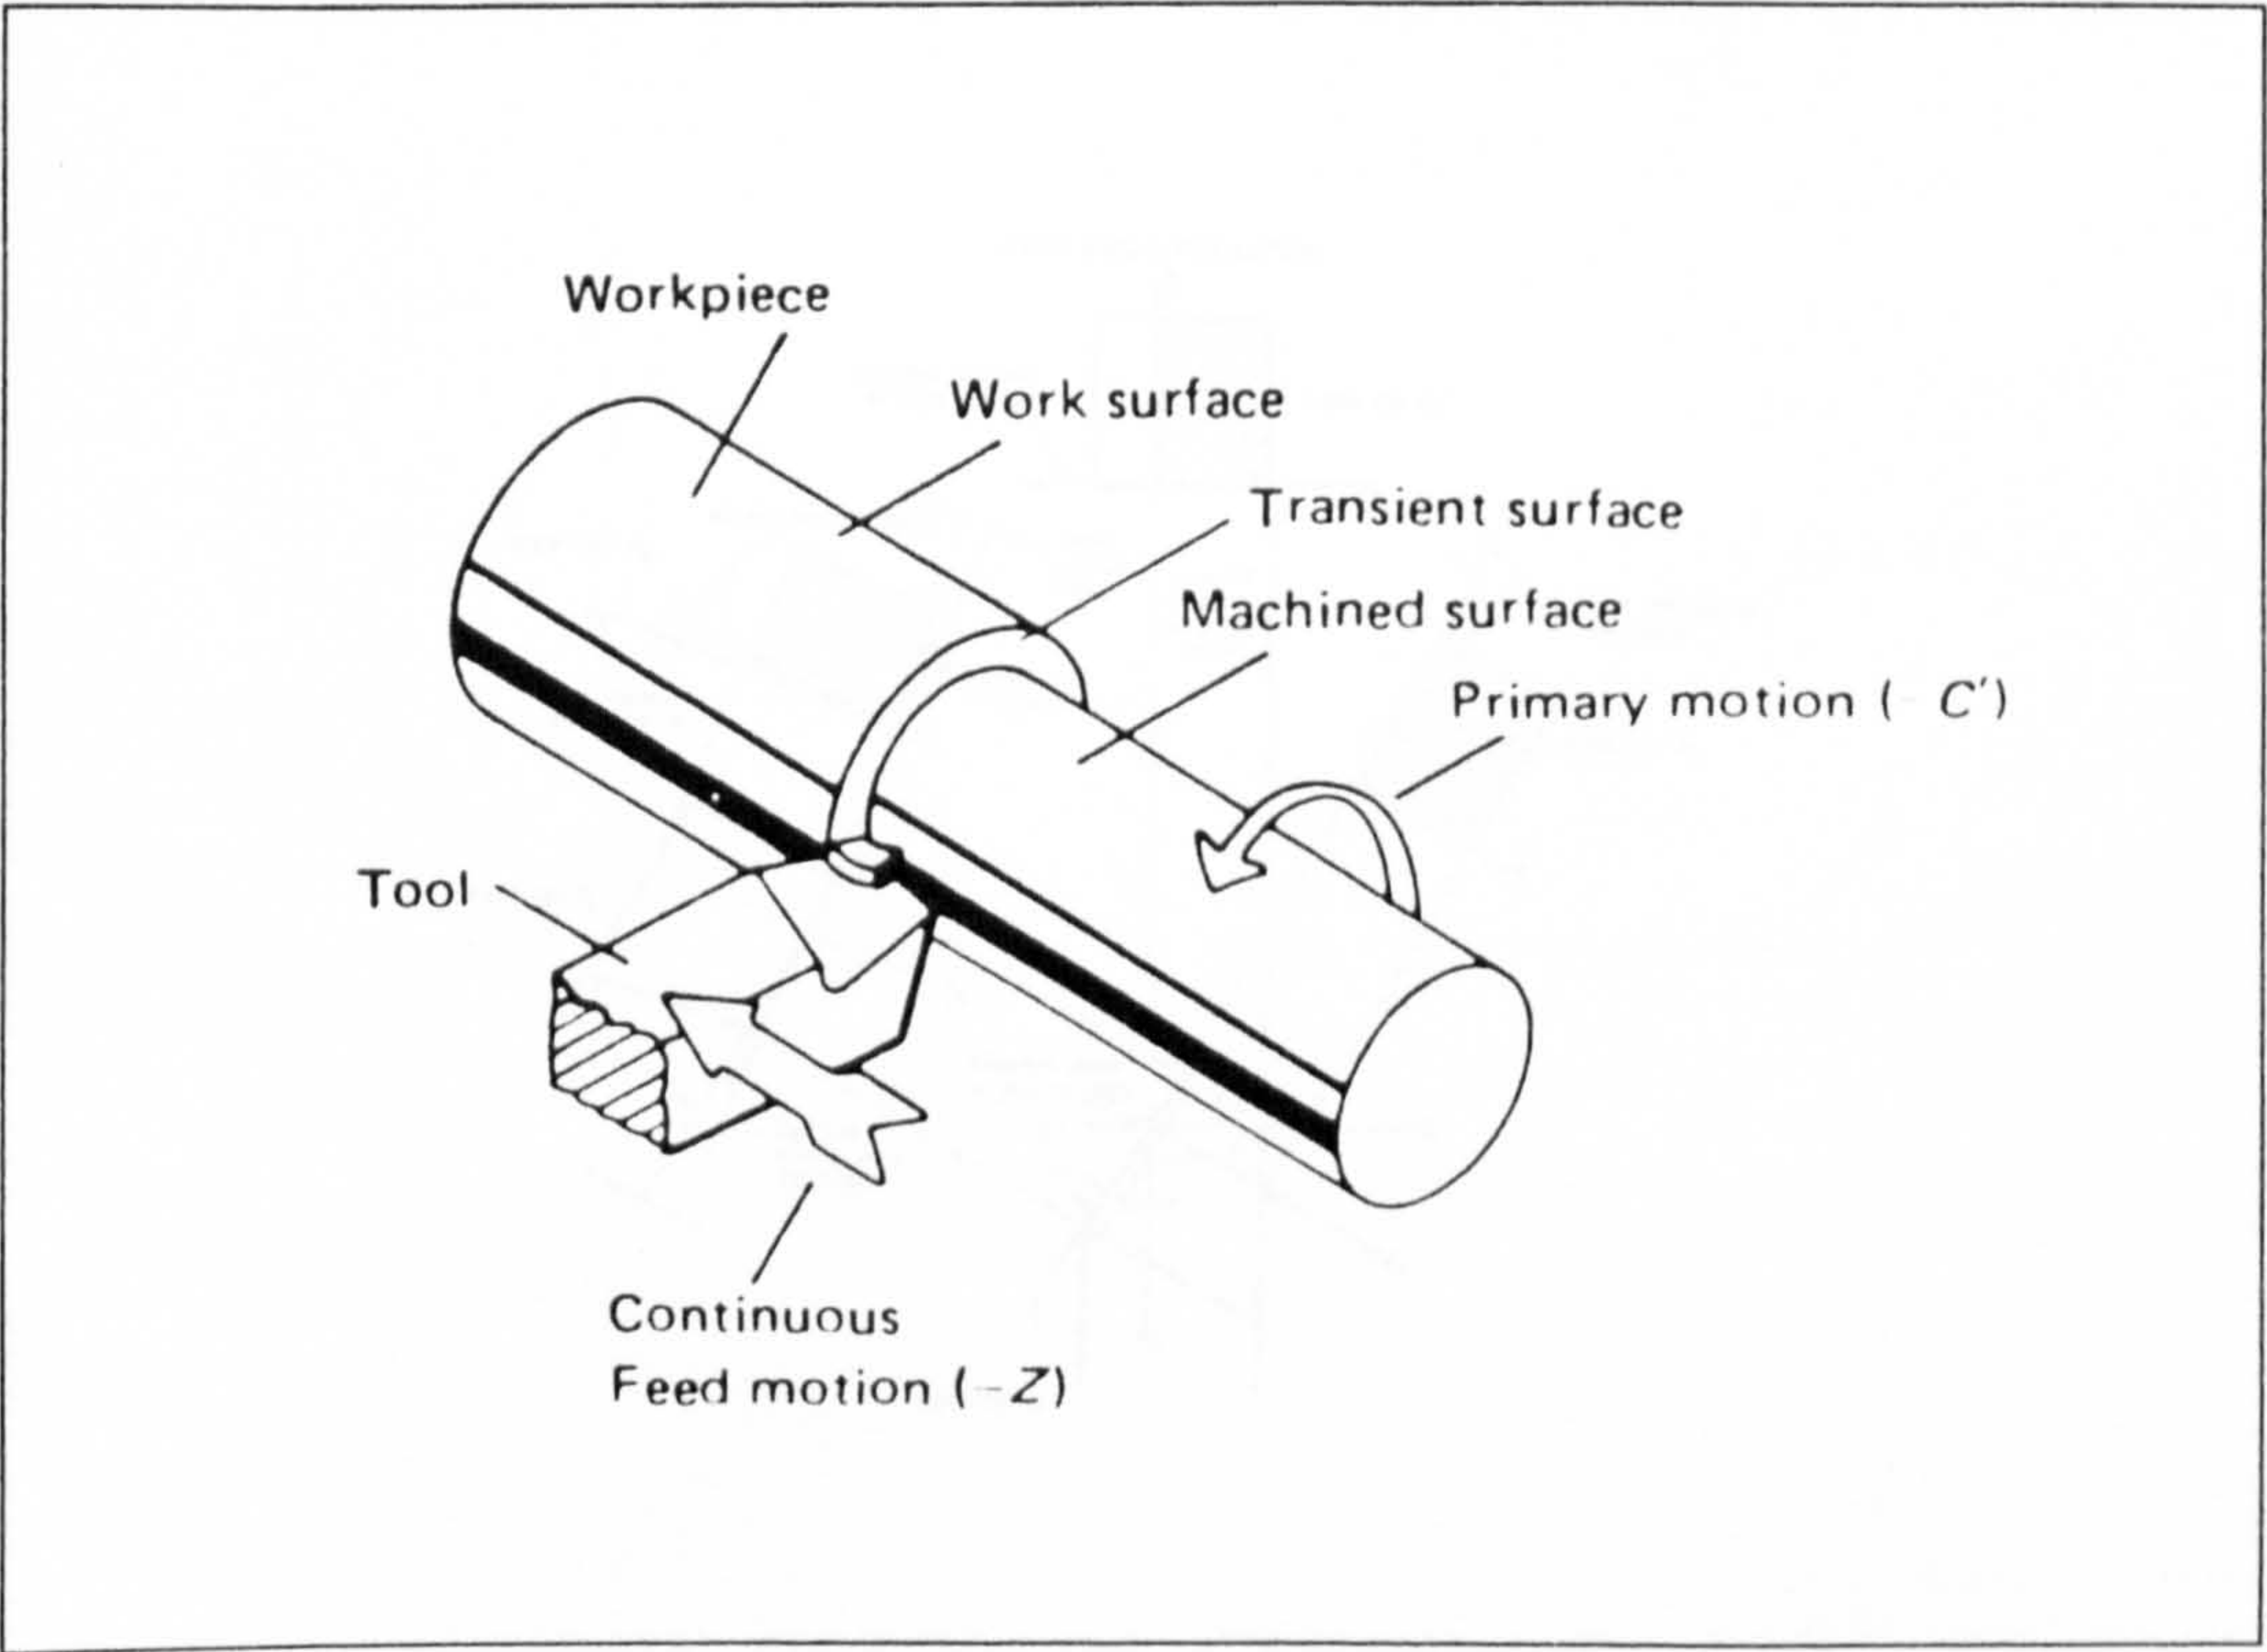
(b) Cylindrical Turning On An Engine Lathe [17]
